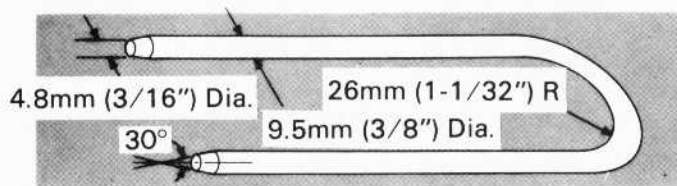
Lever And Shaft Assembly Alignment Tool 21129
